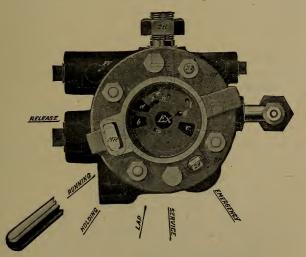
Rotary Valve Seat H-6 Automatic Brake Valve.
